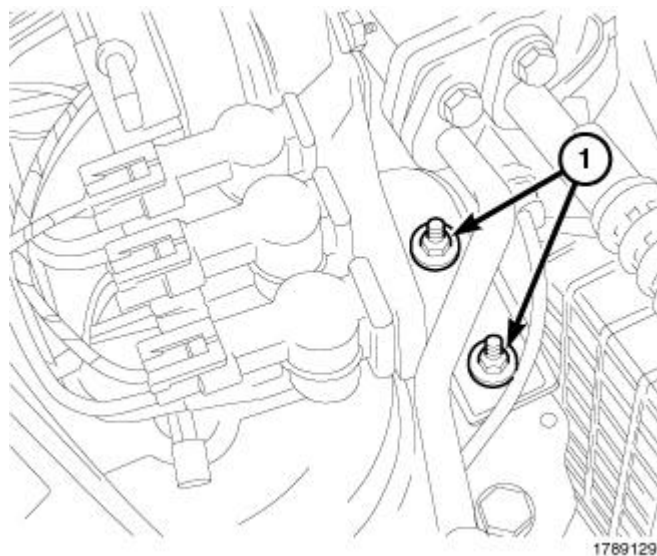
Nuts Securing Solenoid Mounting Bracket
